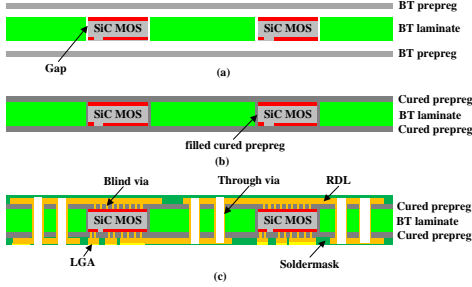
Fan-out panel-level PCB embedded SiC MOSFETs package (a) before laminating; (b) after laminating; (c) final package structure
